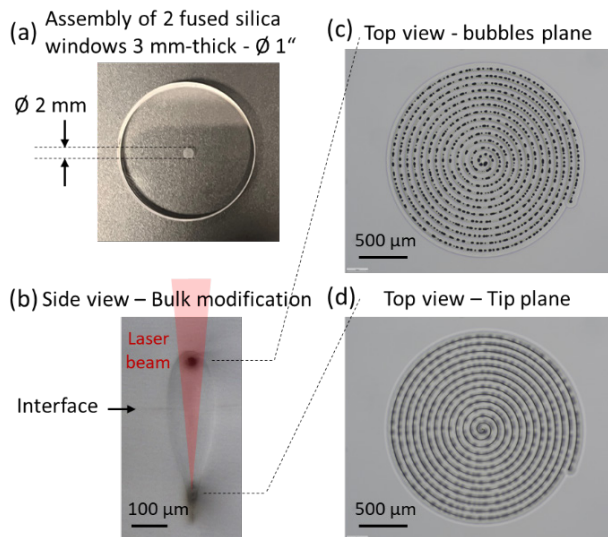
(a) Assembly of fused silica samples with a thickness of 3 mm and a diameter of 1 inch used for the shear strength measurements; (b) Sideview of the bulk modification and its location relative to the interface; (c) Top view of the welded pattern in the bubbles plane; (d) Top view of the welded pattern in the tip plane.
